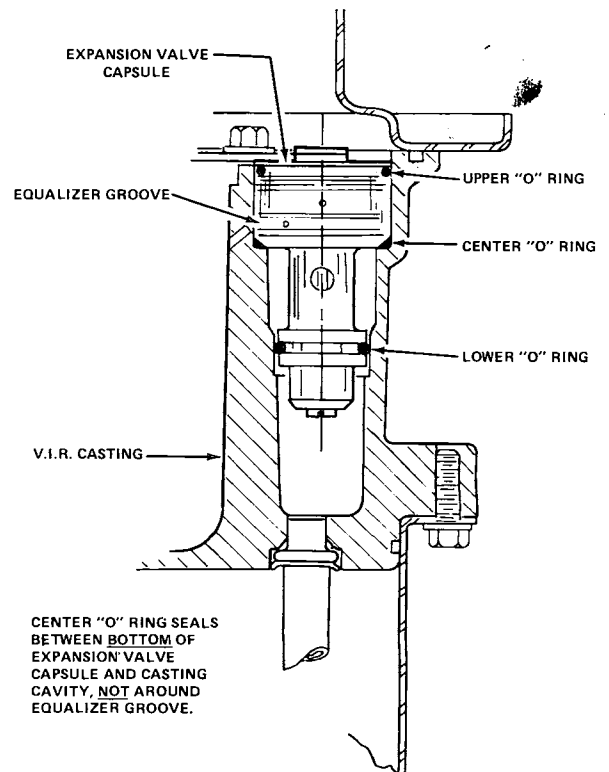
B-20 Location of Upper and Lower "O" Rings on TX Valve - Early Production H Series
